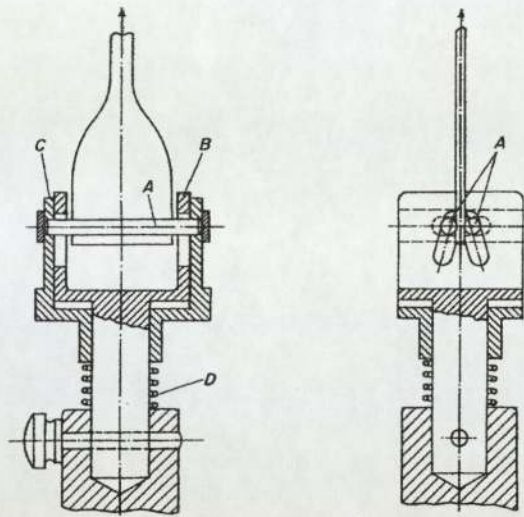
Grips used with Dumbbell specimen in tensile machine [30]
